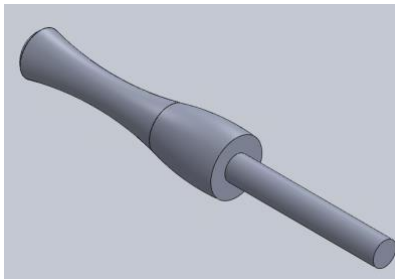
Main Body Scalpel Handle with 51.67mm Grip Core
